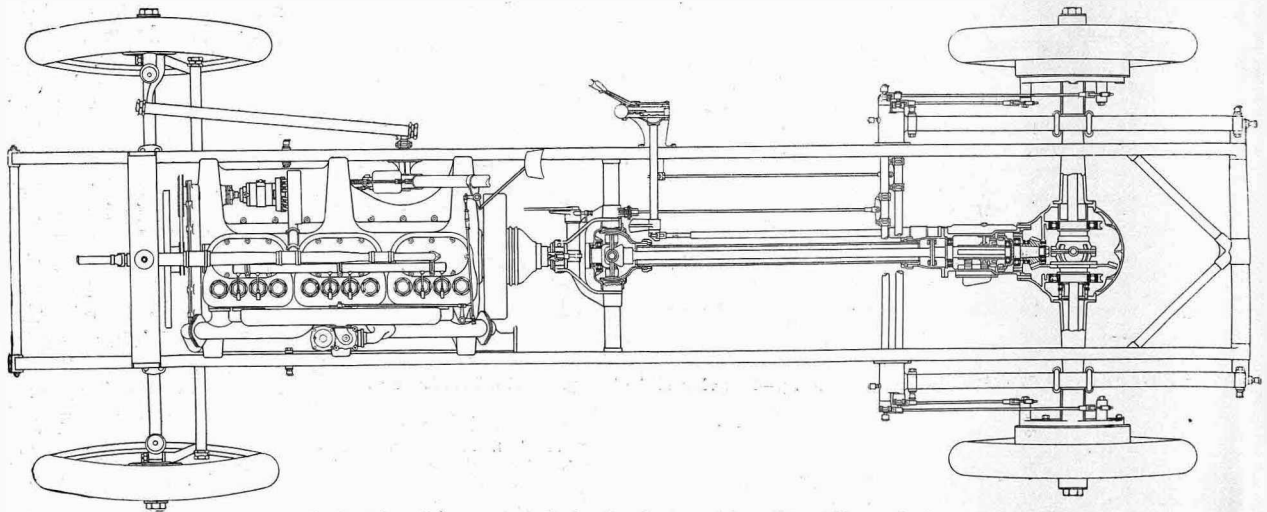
Plan view of the chassis showing the general disposition of the mechanism.
